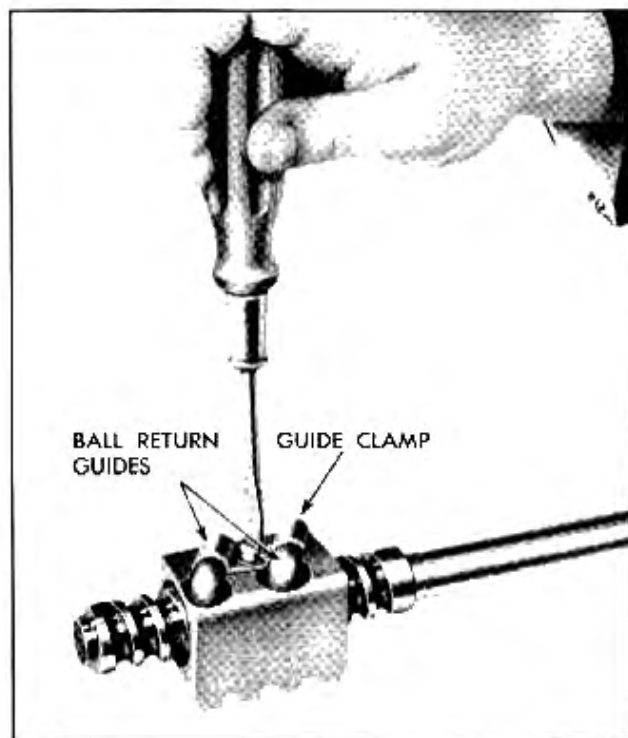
Removing or Replacing Ball Nut Return Guide Clamp
